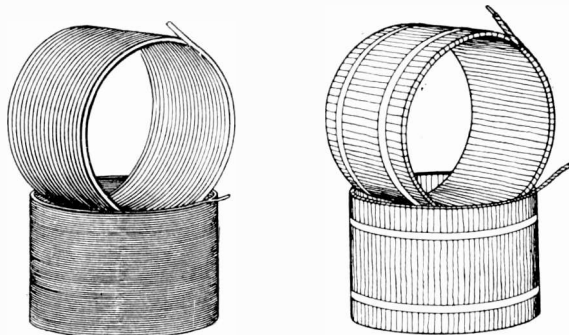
Specimen Coils for General Electric Core-Type Transformer
